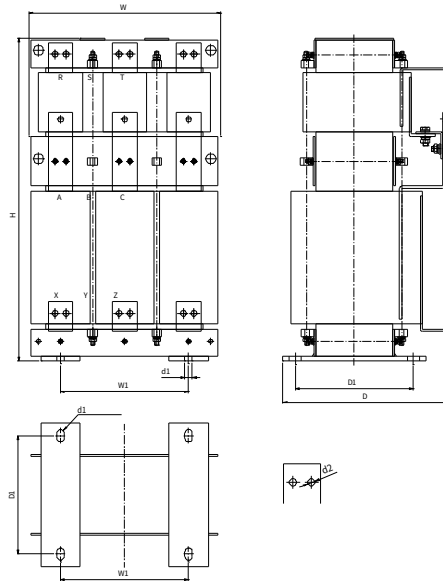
A8+LCL frame installation dimensions (unit: mm)
